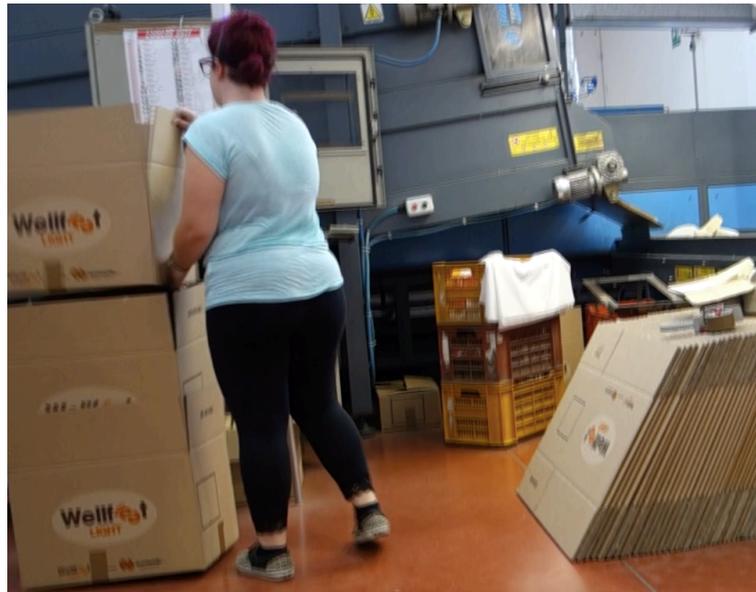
OPC_2 pre-folded box picking (onsite photo)
